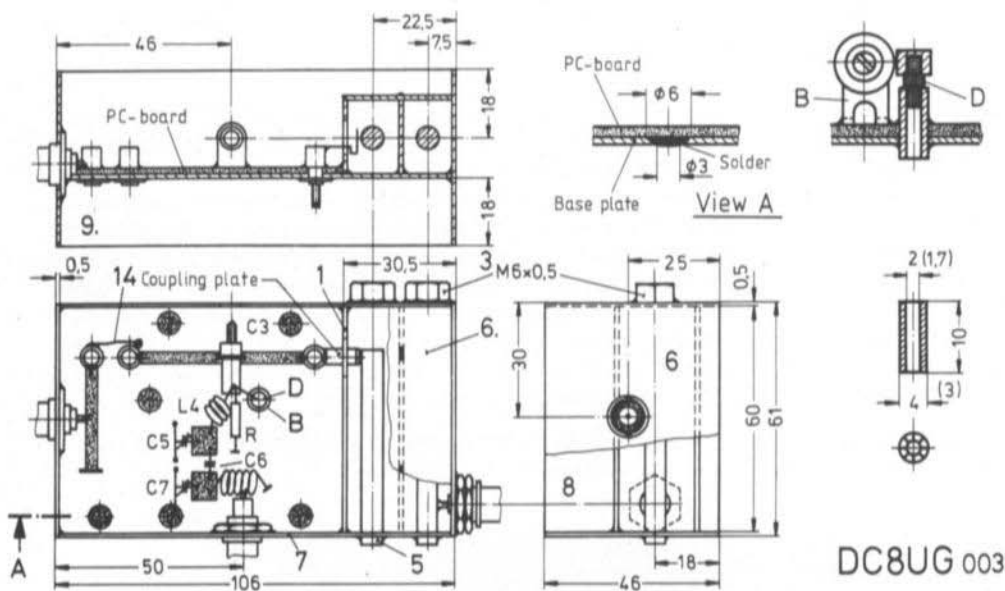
Layout of module DC 8 UG 003 with the most important dimensions
